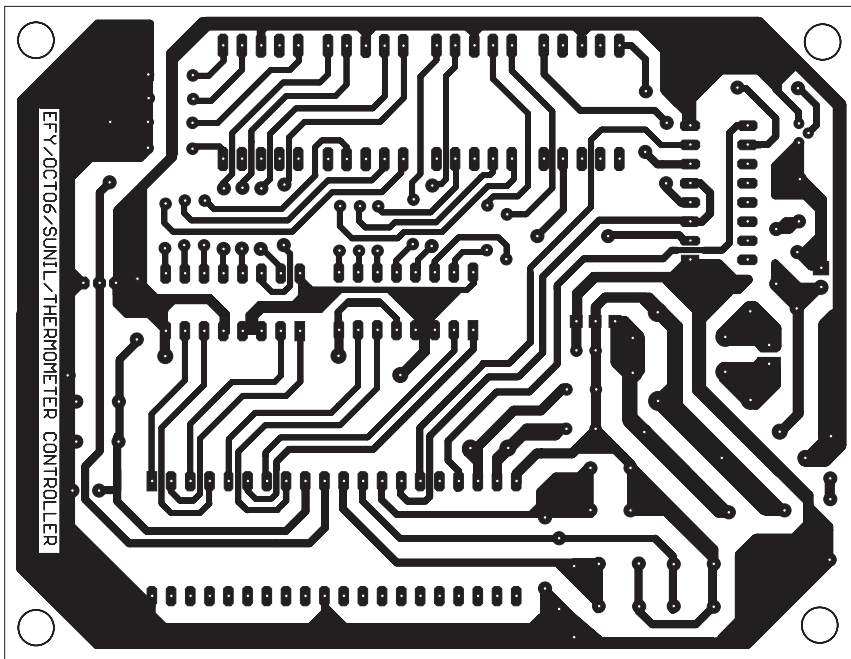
Actual-size, single-side PCB layout for digital thermometer-cum-controller
